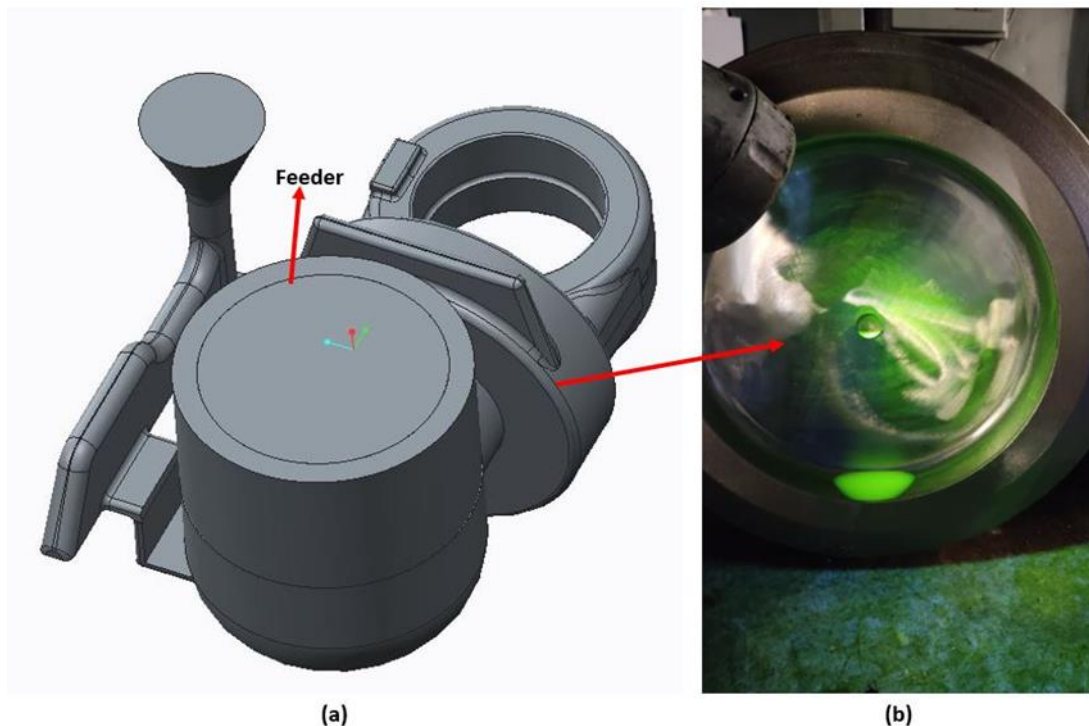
(a); Image of the mold design of the cast part, (b); Image of the flange of the casting part under UV light after machining.
